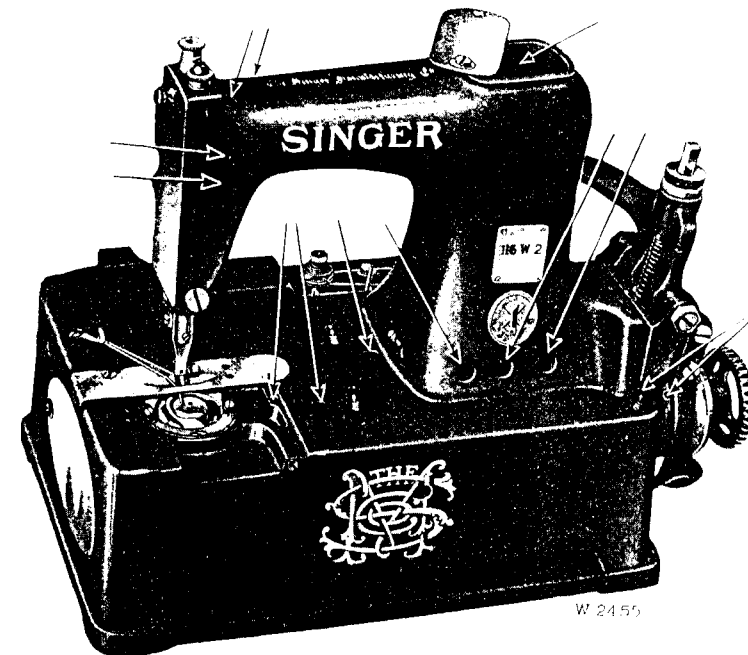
OILING POINTS AT THE FRONT OF THE MACHINE
